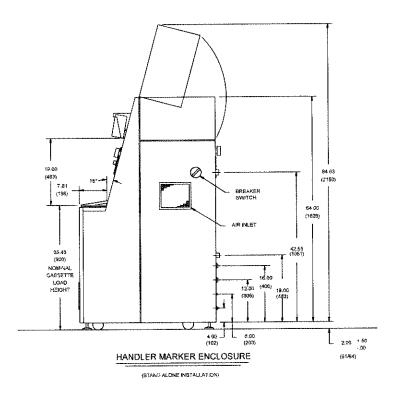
Handler/Control Marker Installation Footprint Dimensions - Side View
